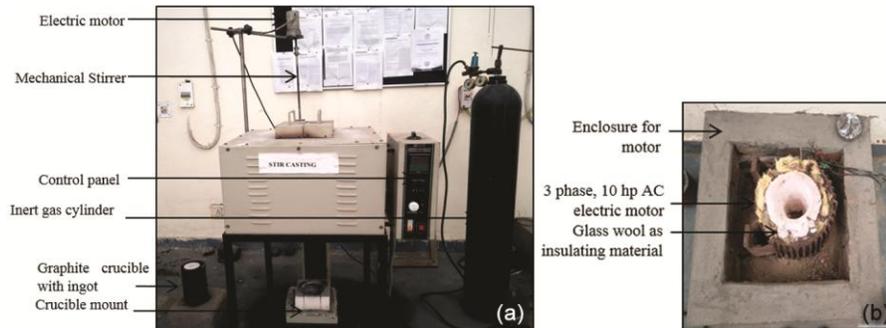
(a) Conventional mechanical stir casting setup (b) electromagnetic stirrer
